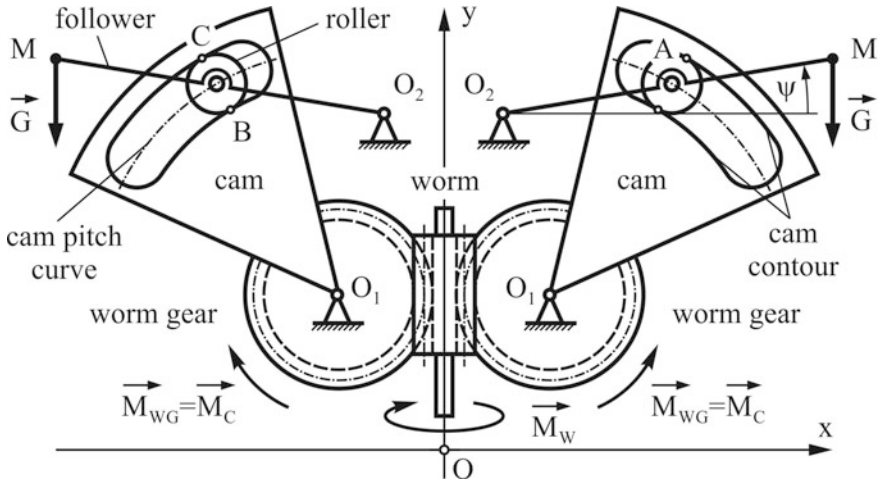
Kinematic scheme of the cam-worm mechanism for shoulder shrug
